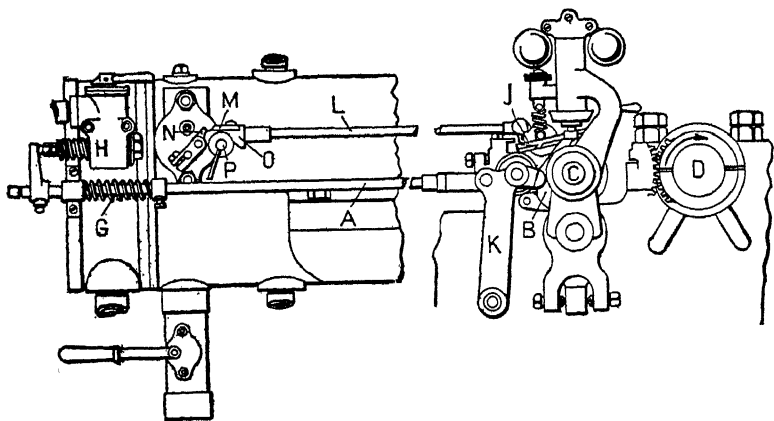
WAYNE ENGINE, VALVE GEAR AND GOVERNOR.
